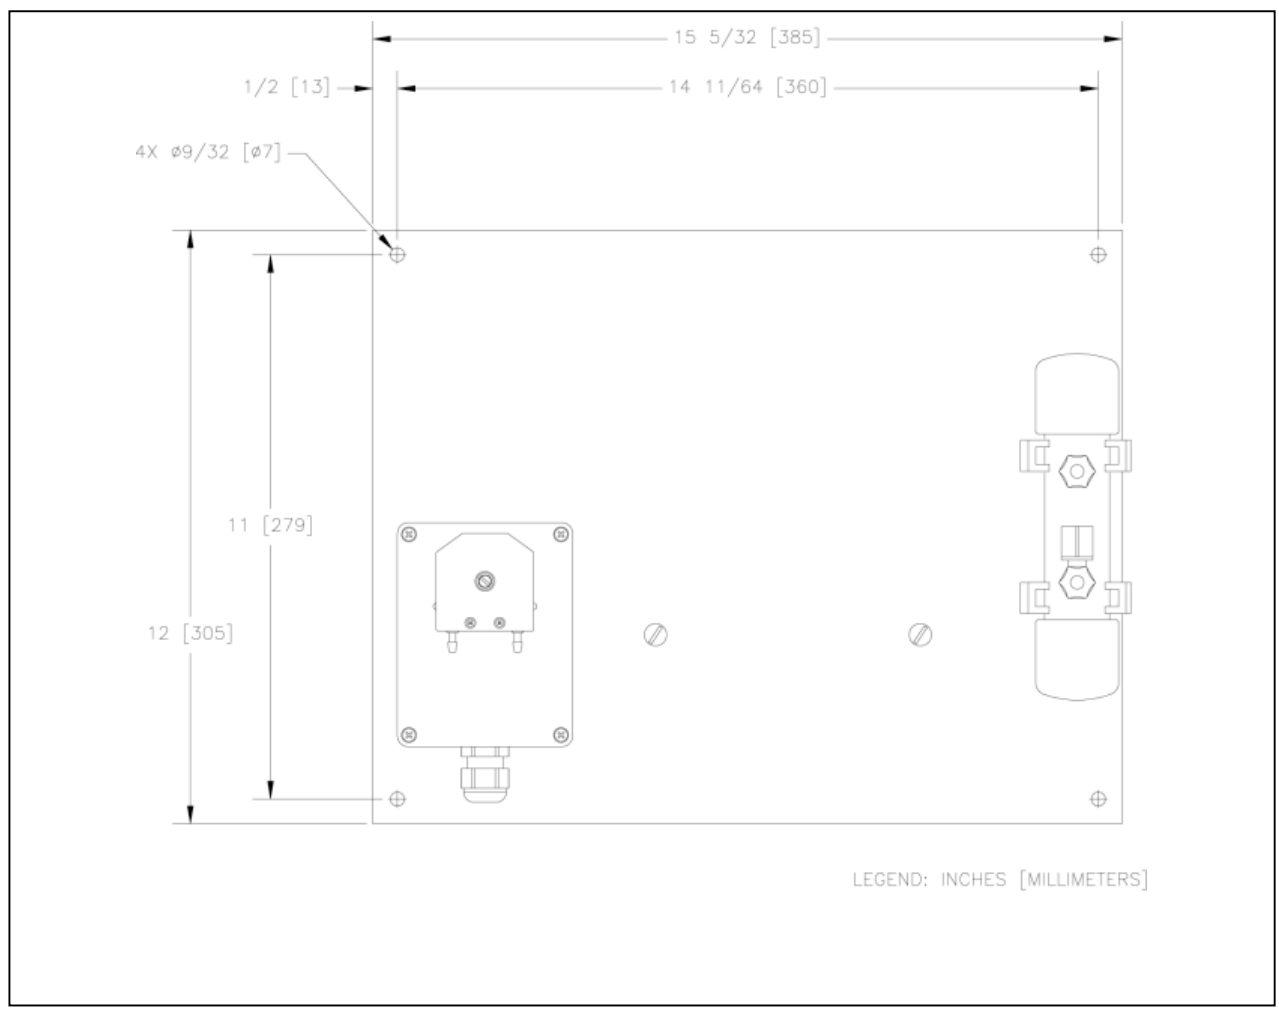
Reagent Feeder Assembly, Mounting dimensions
